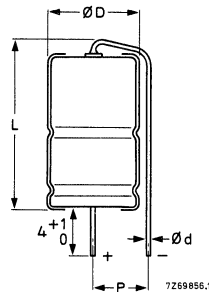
Style 3; see Table 1c for dimensions d, D, L and P.
